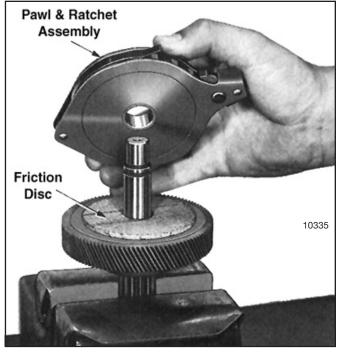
Removing Pawl and Ratchet Assembly from Load Brake Shaft
